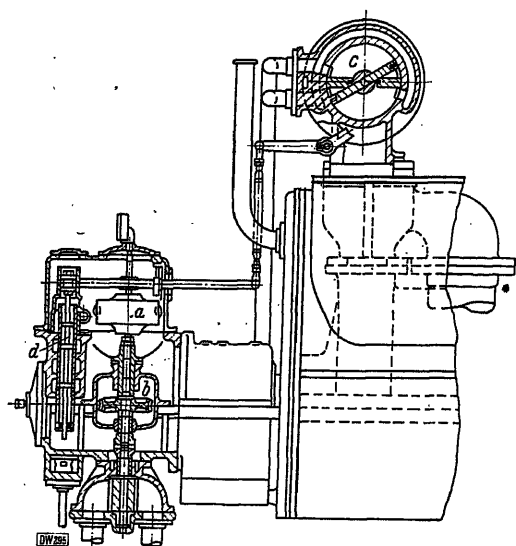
S.S.W., governor drive and power piston of a high-pressure turbine
